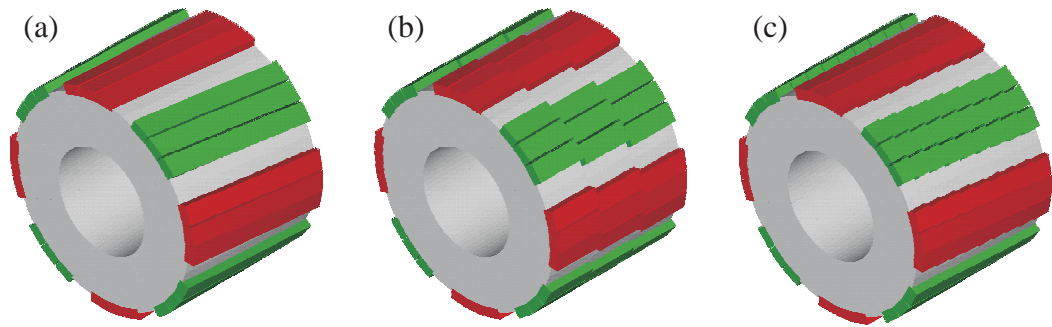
Skewing of the rotor of a permanent magnet machine. (a) Continuously skewed rotor with specially shaped magnets (3×3 segments per pole). (b) Staged skewed rotor with 3 rings and with box-shaped magnets (3 segments per ring). (c) Approximation of a continuously skewed rotor using the multi slice technique (e.g. staged skewed rotor with 9 rings (or slices)).
